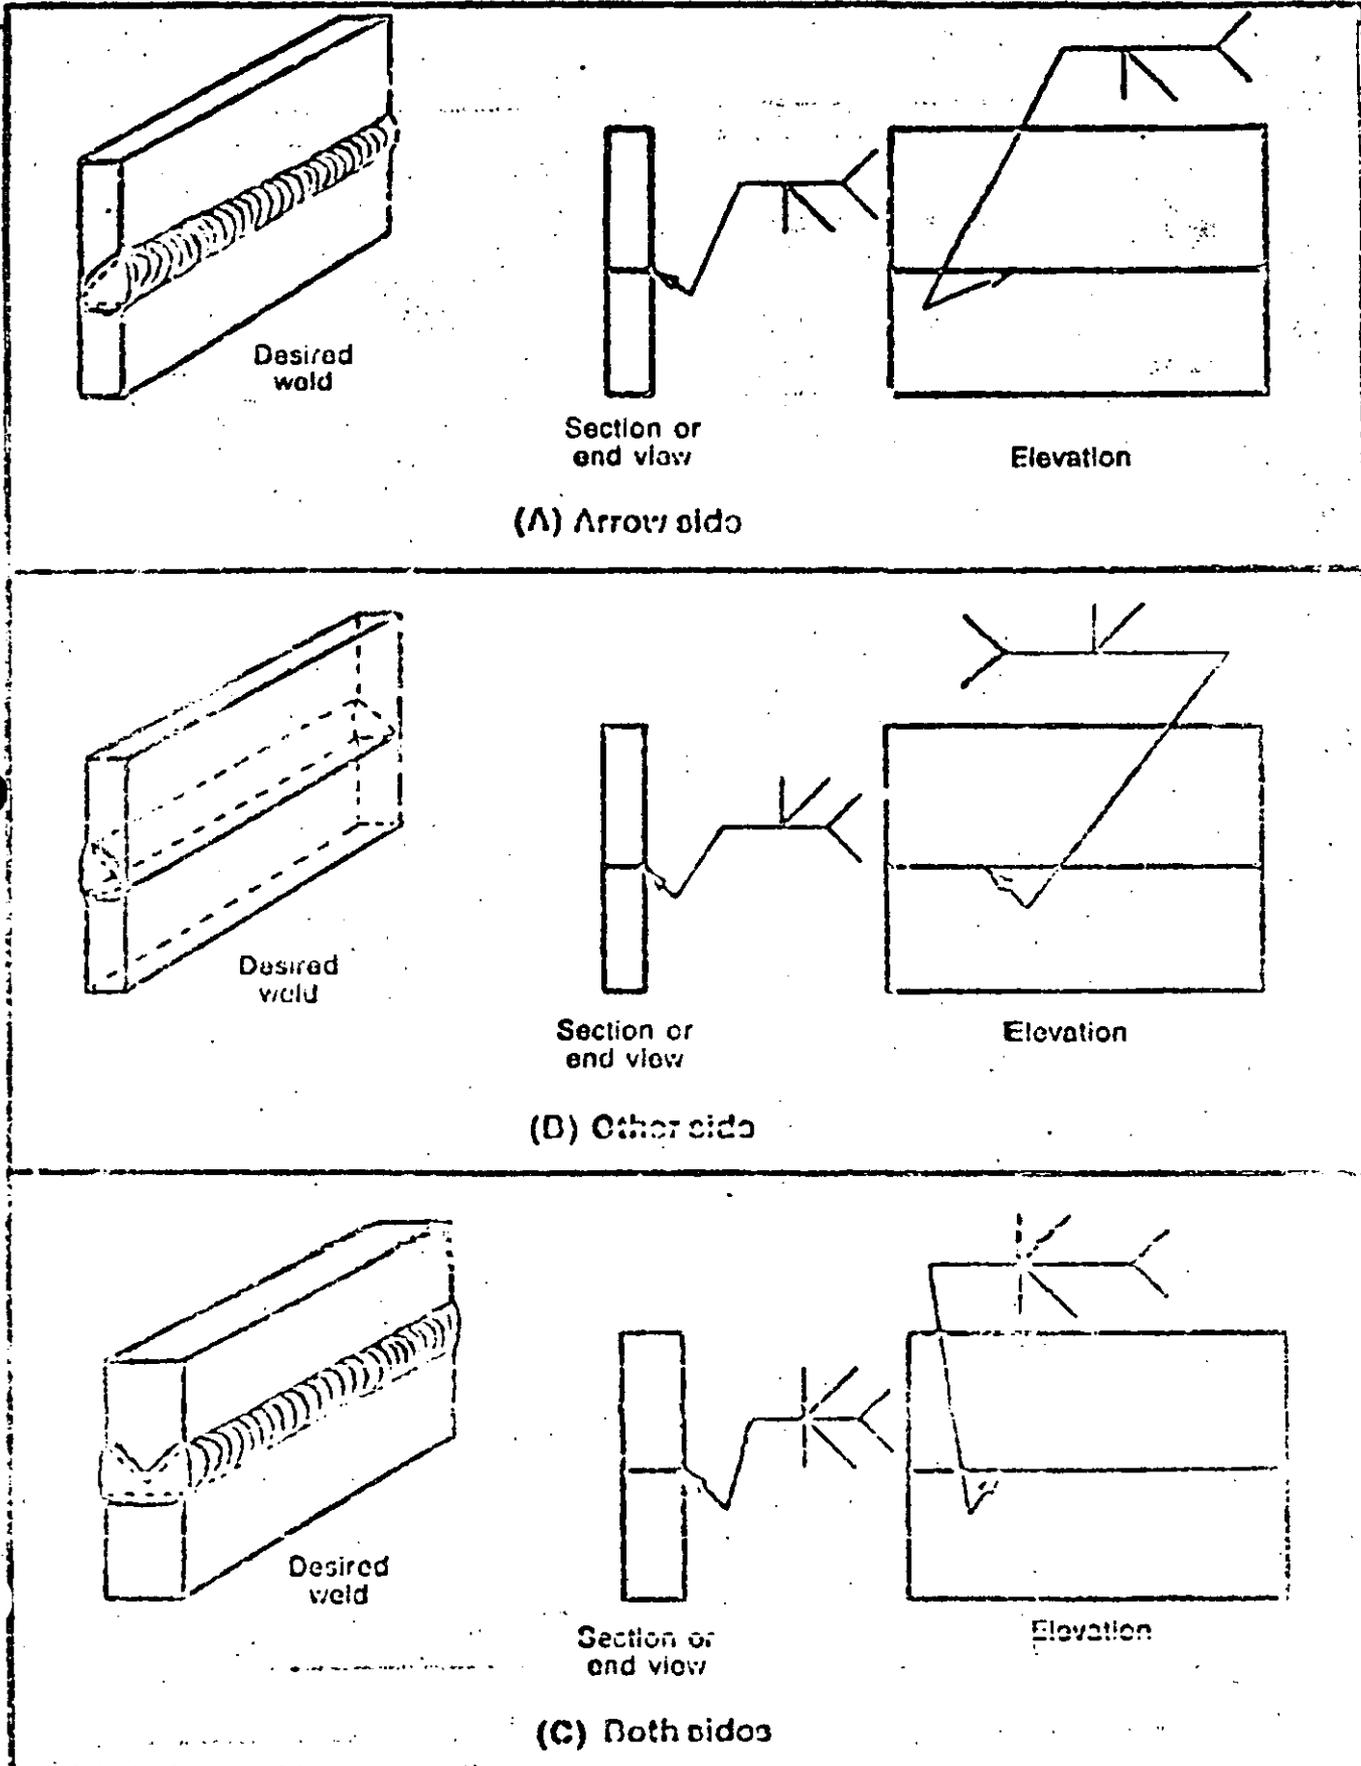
Application of break in arrow of welding symbol (U-groove weld).
